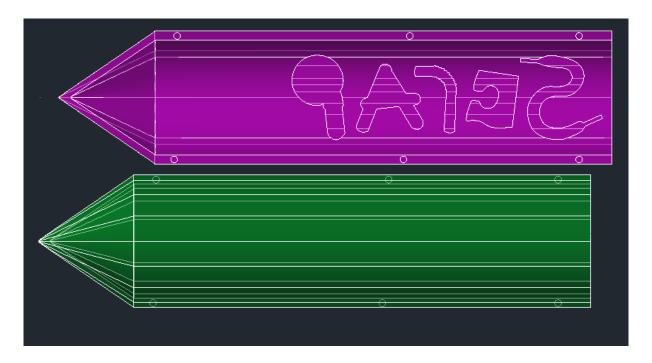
'SCRAP' candle mold rendered in 3-D printer. Designed by Mary Krieger.
